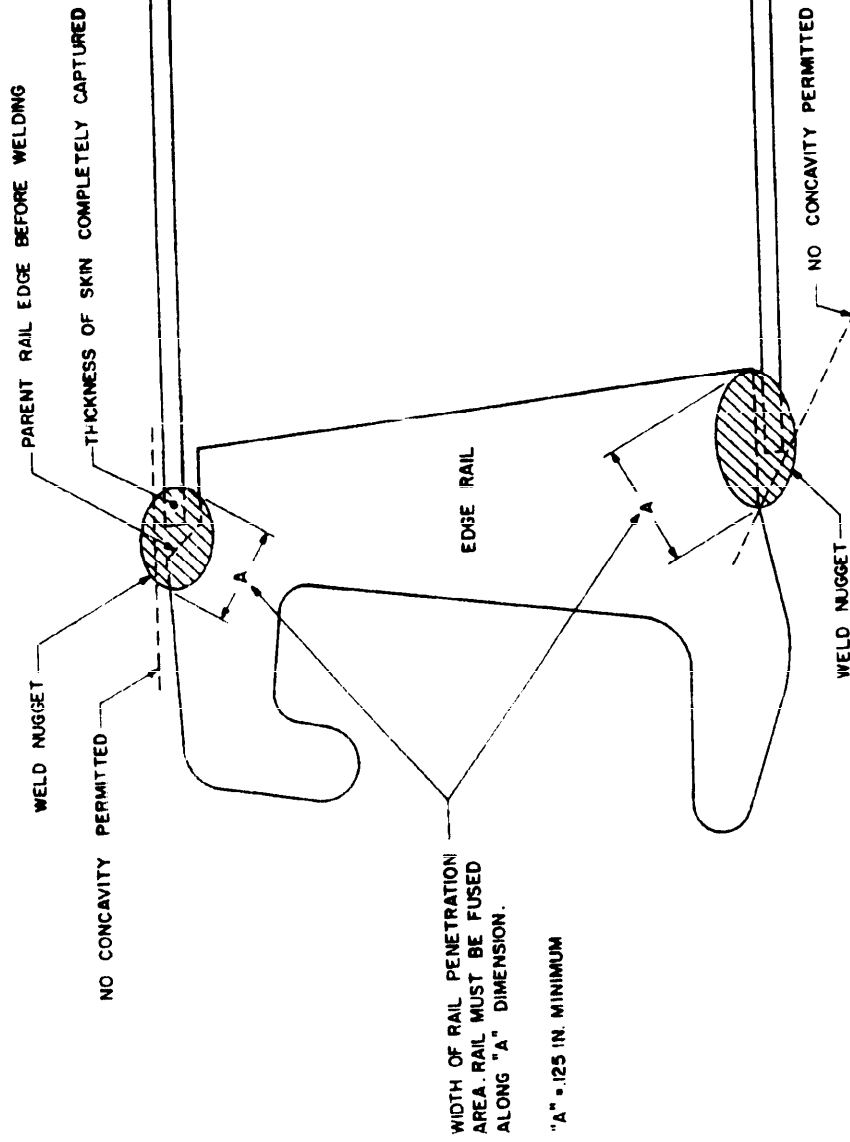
SKIN-TO-RAIL WELD SHOWING PENETRATION OF SKIN AND RAIL
